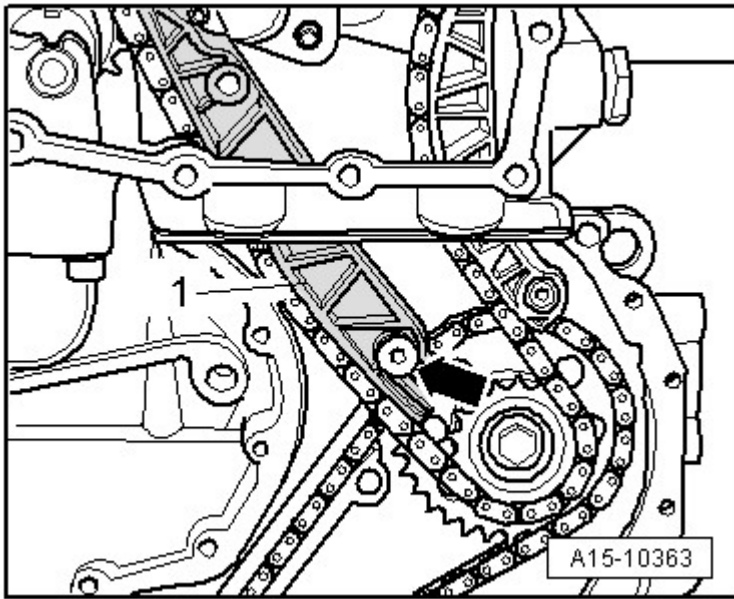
Identifying Mounting Pin -Arrow- And Guide Rail -1-
